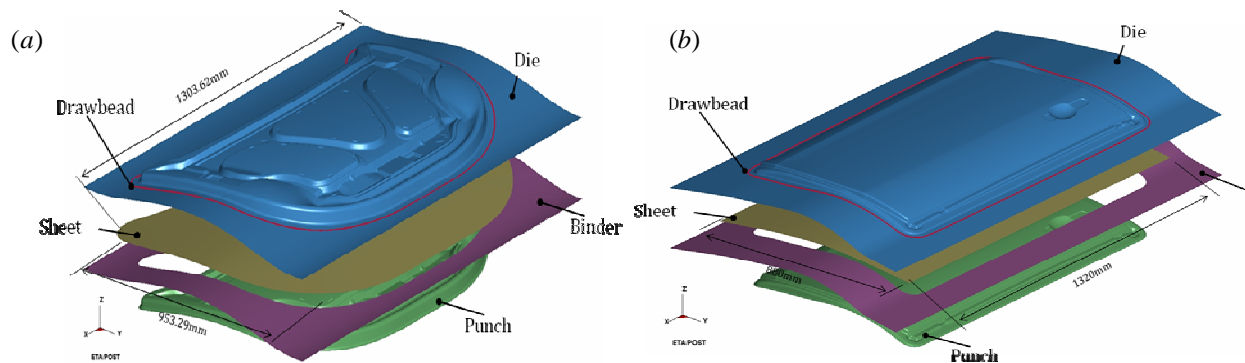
Forming models: (a) Hood inner panel (b) Door outer panel.
